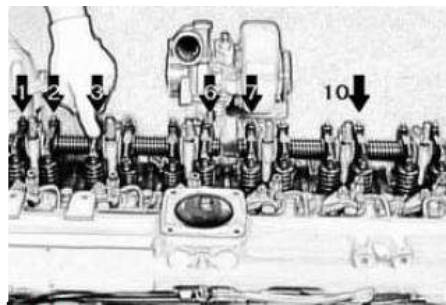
Valve Clearances Adjustment for Six-cylinder Engine
